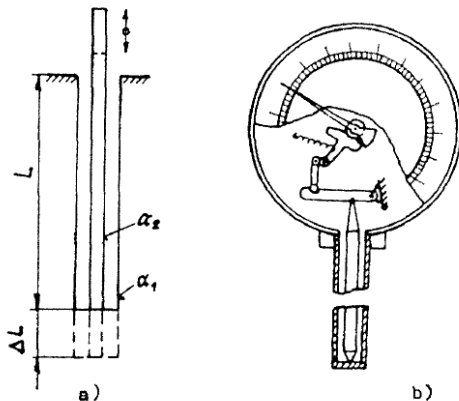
Rod expansion thermometer: a) functional principal, b) technical execution
